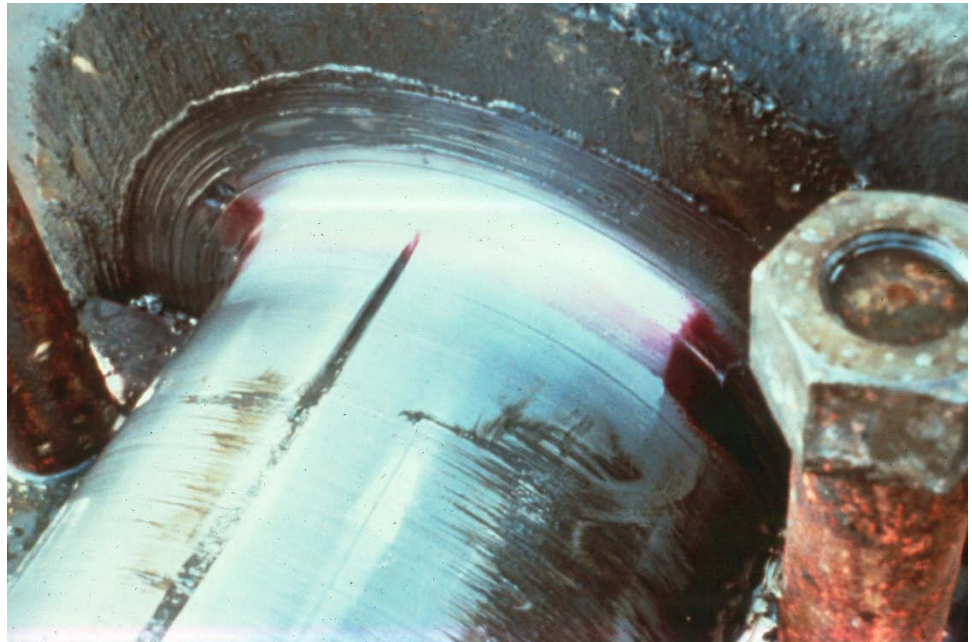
Hairline Crack Revealed on Shaft from Dye Penetrant Test
